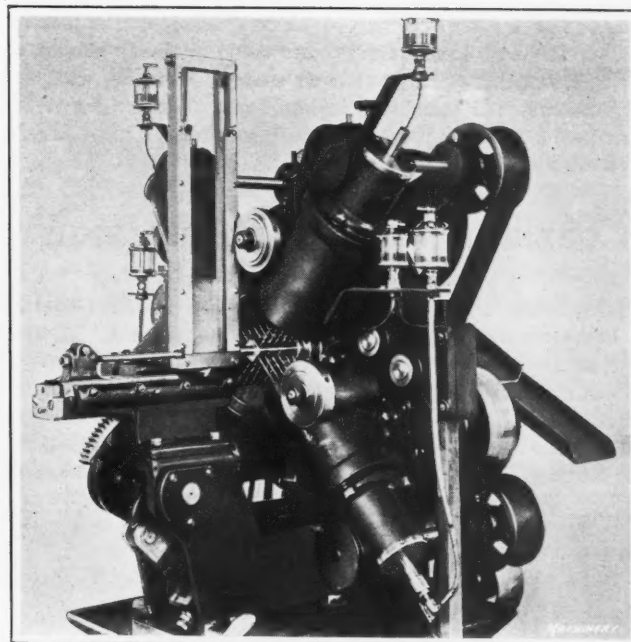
Close View of Upper Part of Machine shown in Fig. 1
